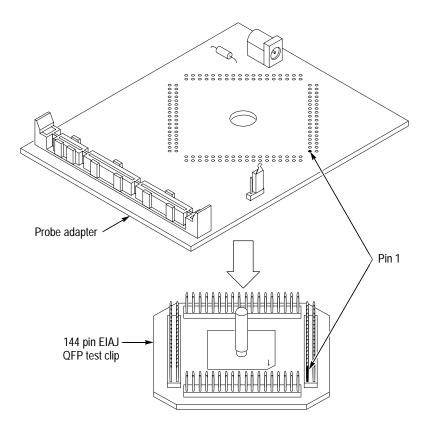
Attaching the PQFP clip to the probe adapter.
